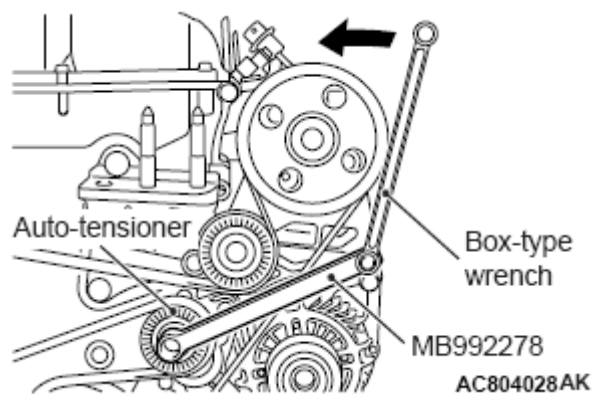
Installing Special Tool MB992278 And Box-Type Wrench
